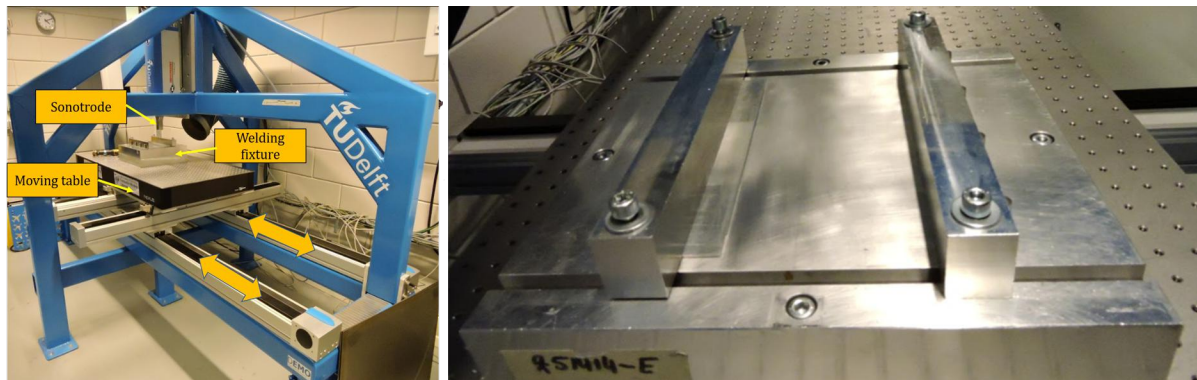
The CUW machine used for the making the continuous welds(left) and the fixture used to hold the specimens(right)
